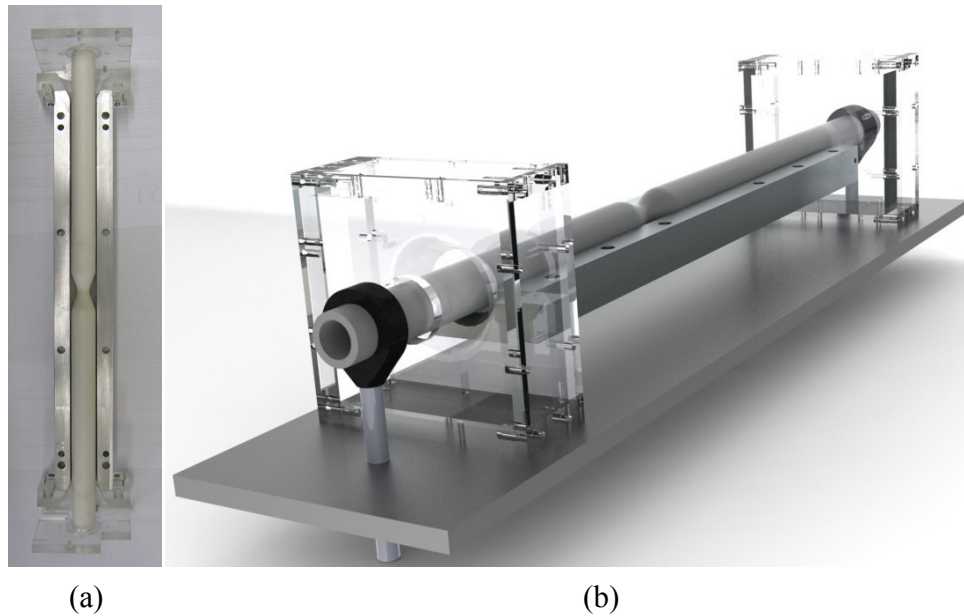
(a) plaster model located in female aluminium mould (b) alignment rig assembly used to ensure uniform wall thickness.
